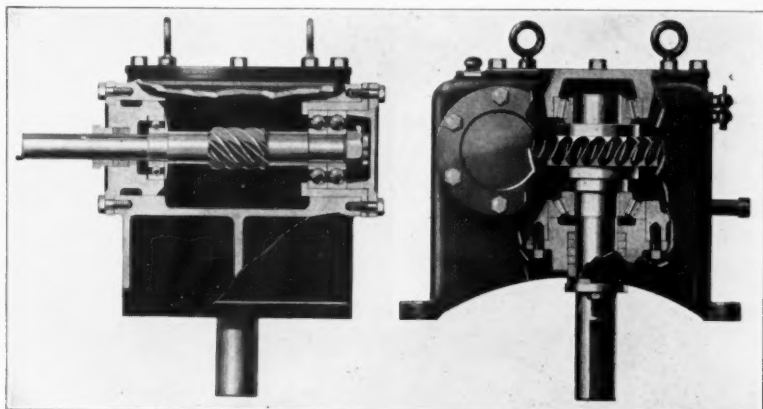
Showing a Cleveland vertical worm reduction gear unit. This is lubricated entirely by splash, oil being carried to the proper level to reach the upper gear shaft bearing.
